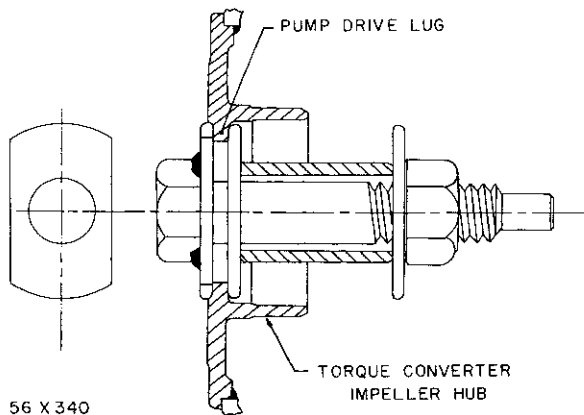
Tool C-3461 Installed in Torque Converter Hub
